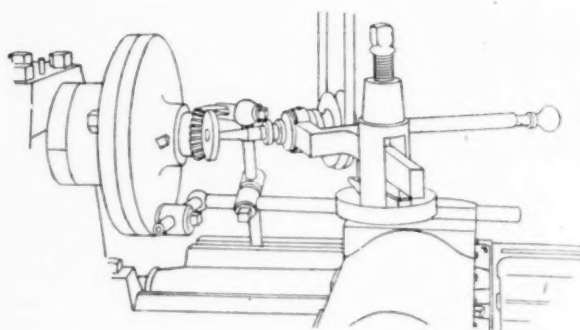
Grinding a Bevel Cutter Placed on Expansion Arbor.
